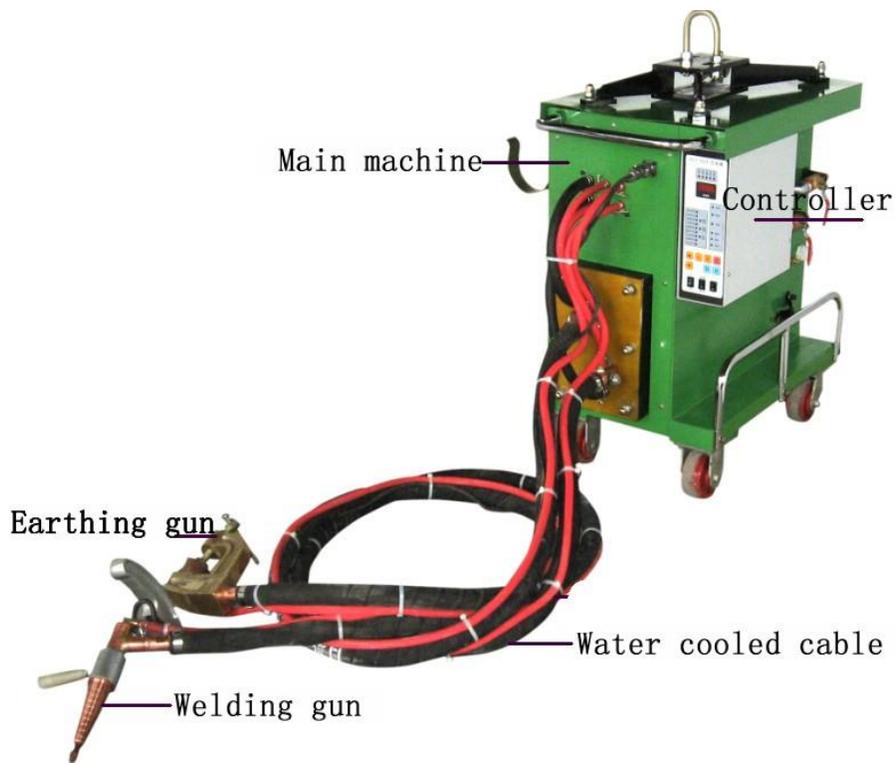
Typical portable one sided resistive spot welding tool
